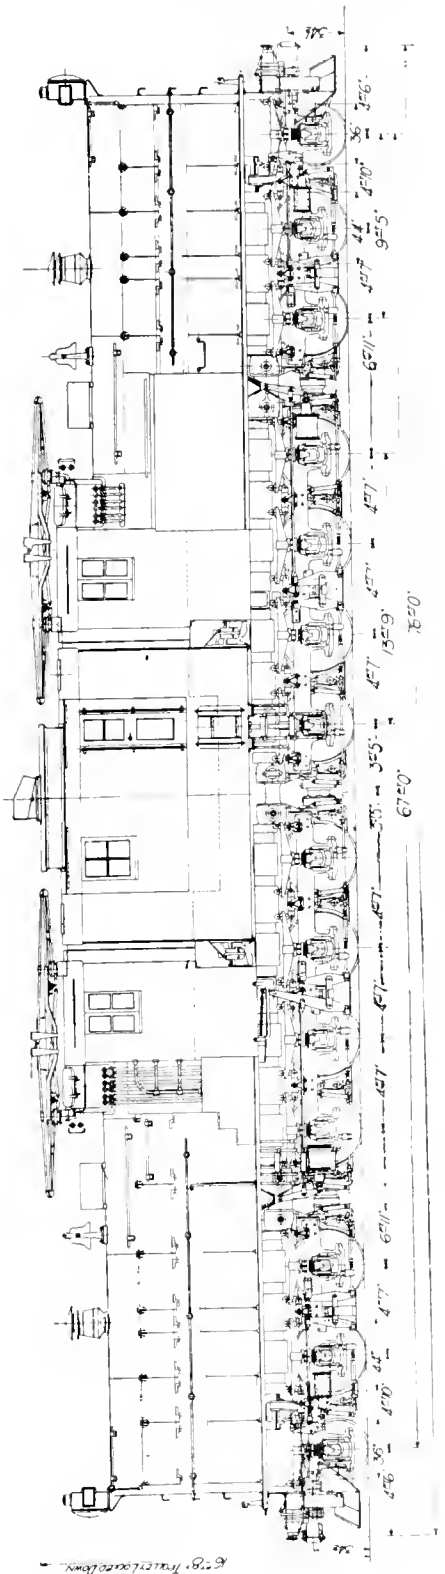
Outline Drawing and Dimensions of New Direct-current Electric Locomotive
